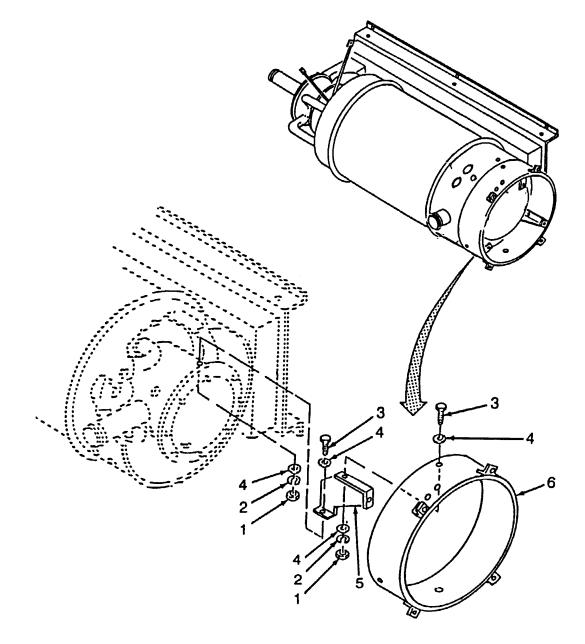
Heat Exchanger, (Model H120) Disassembly
